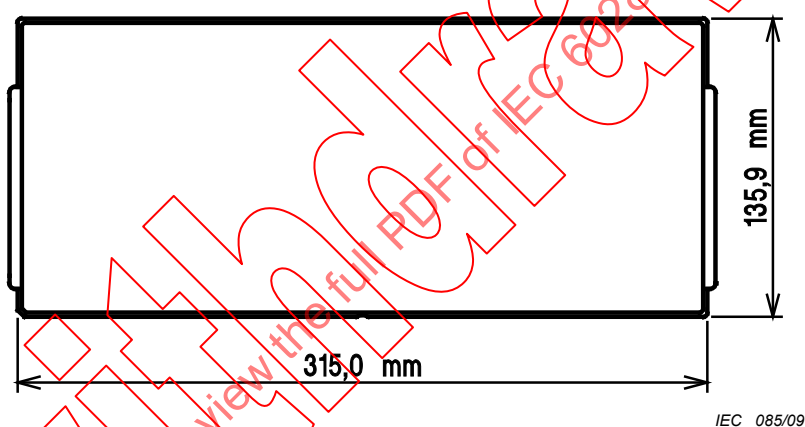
Dimensions 315,0 mm and 135,9 mm
